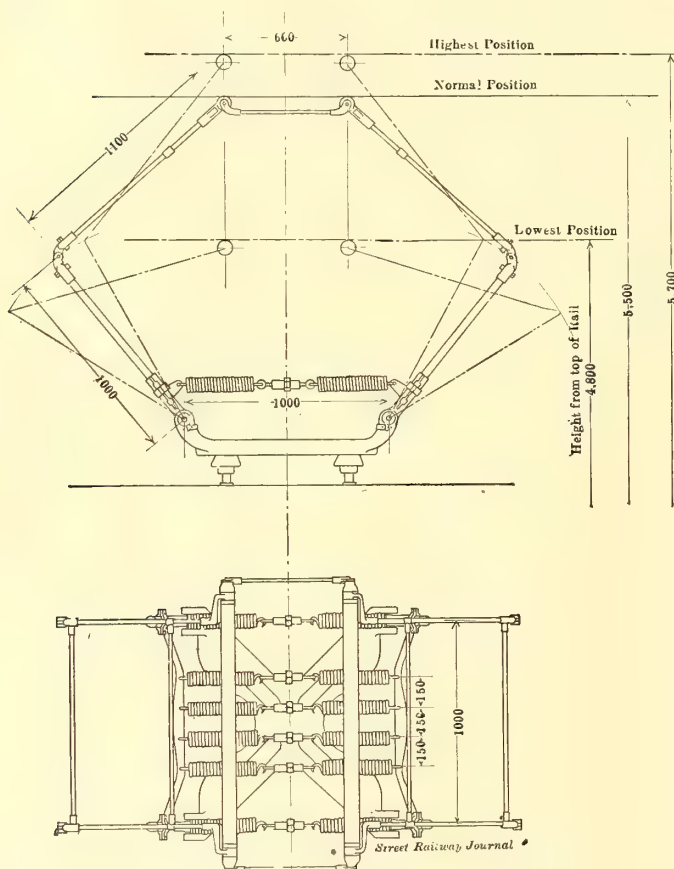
ELEVATION AND PLAN OF FINZI COLLECTOR FIRST USED
